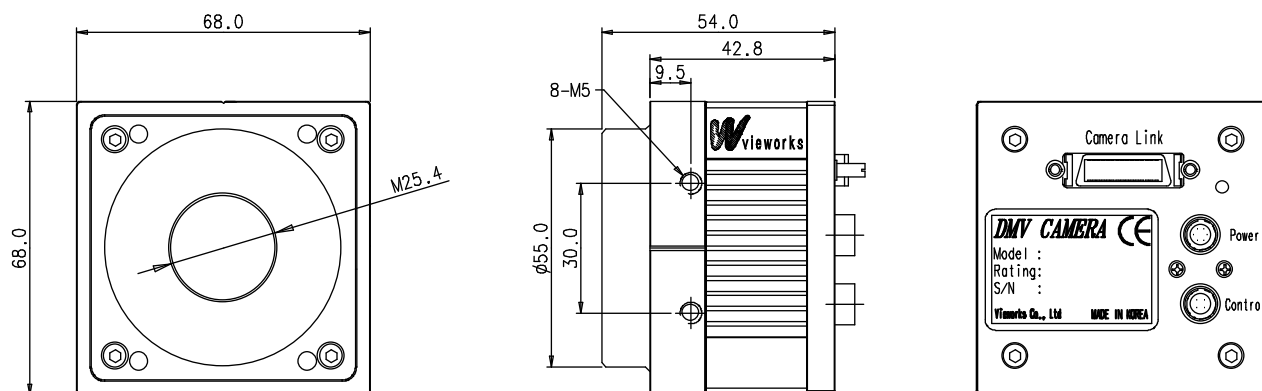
VH-5MC Mechanical Dimension (C-Mount)
